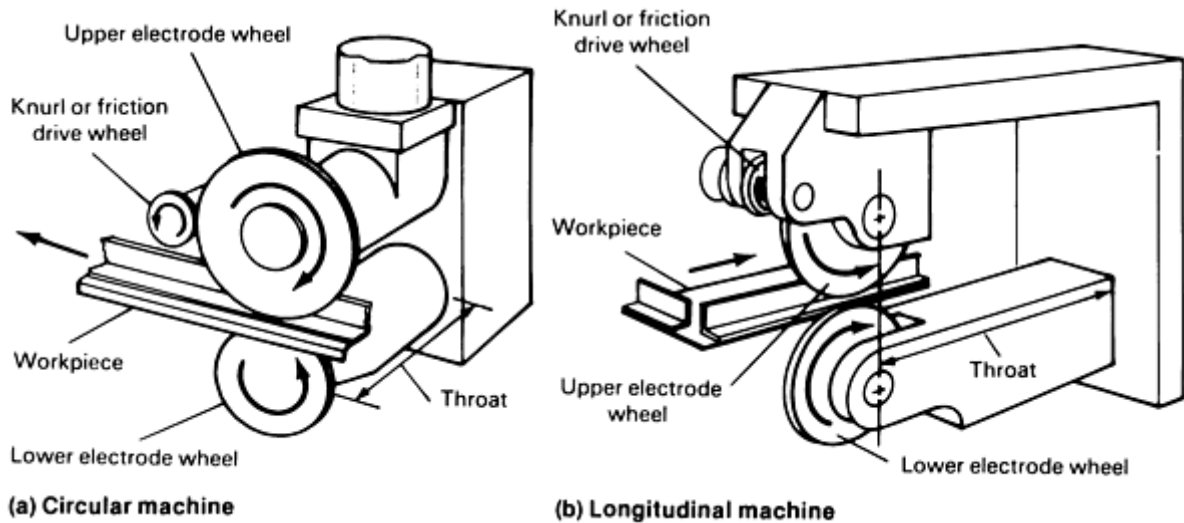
RELATION OF ELECTRODE WHEELS TO OTHER COMPONENTS IN CIRCULAR AND LONGITUDINAL RSEW MACHINES
